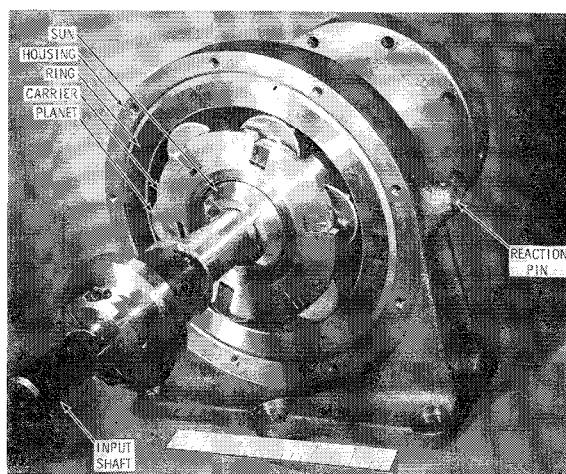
Roller traction drive assembly used in performance tests is shown with housing cover removed.
